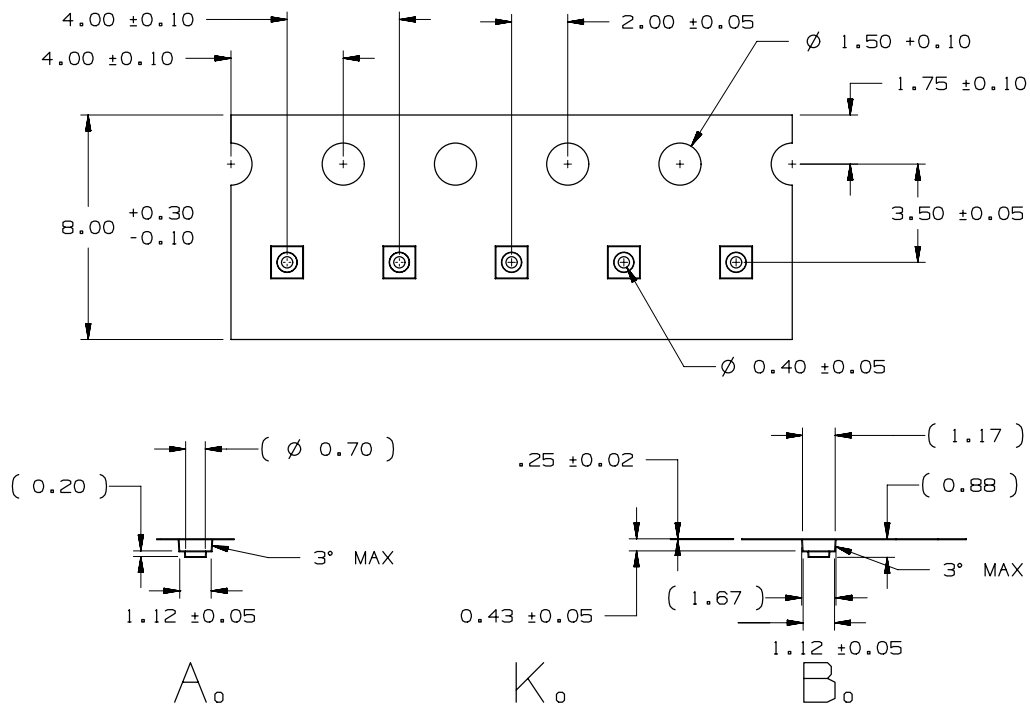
Pocket tape dimensions for LUXEON UV FC Line.
